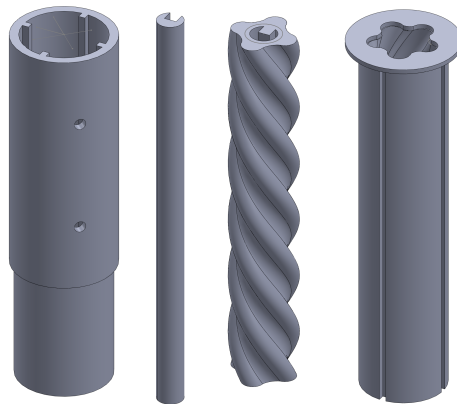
PDM test design. From left to right; housing, shaft, 4-lobe rotor and 5-lobe stator.
